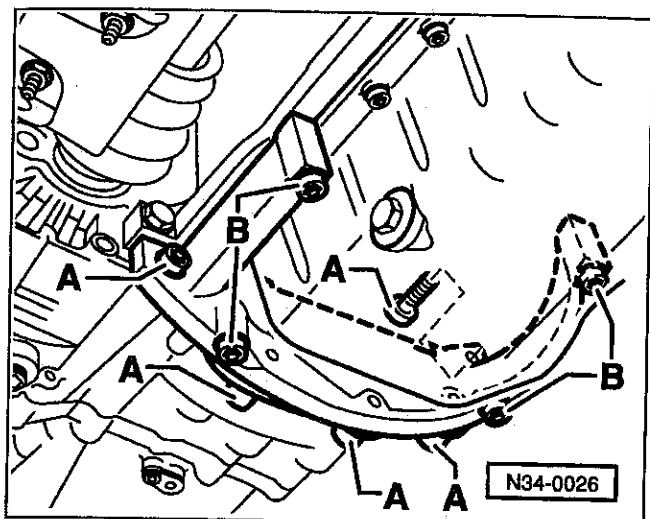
Engine-to-transmission support mounting bolts (A and B).
